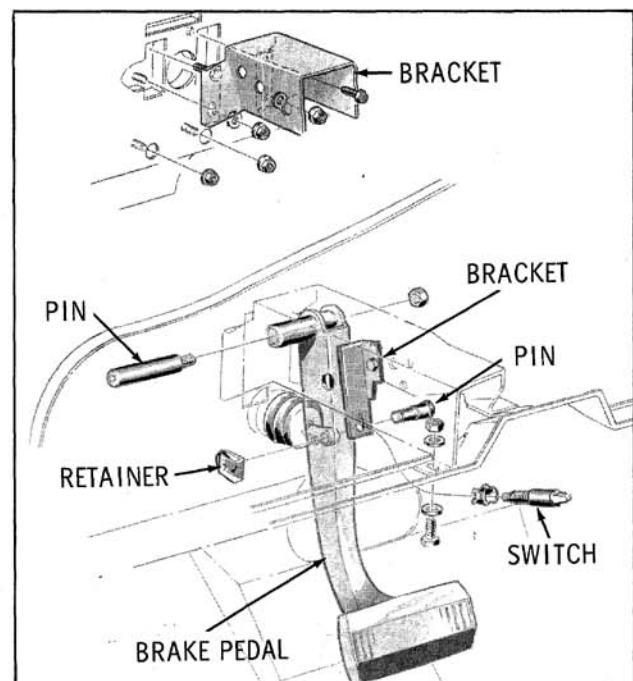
Brake Pedal Mounting (52 through 86 Series)
